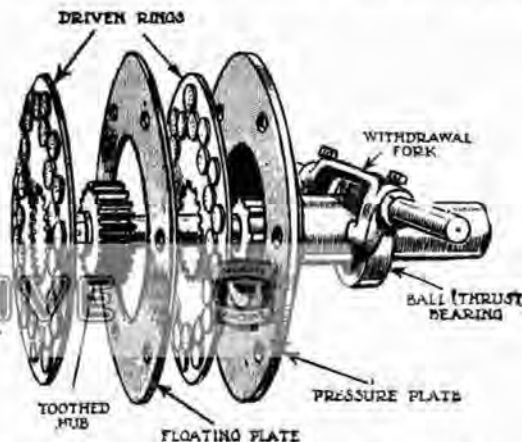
Component parts of the clutch disassembled to show the construction.
